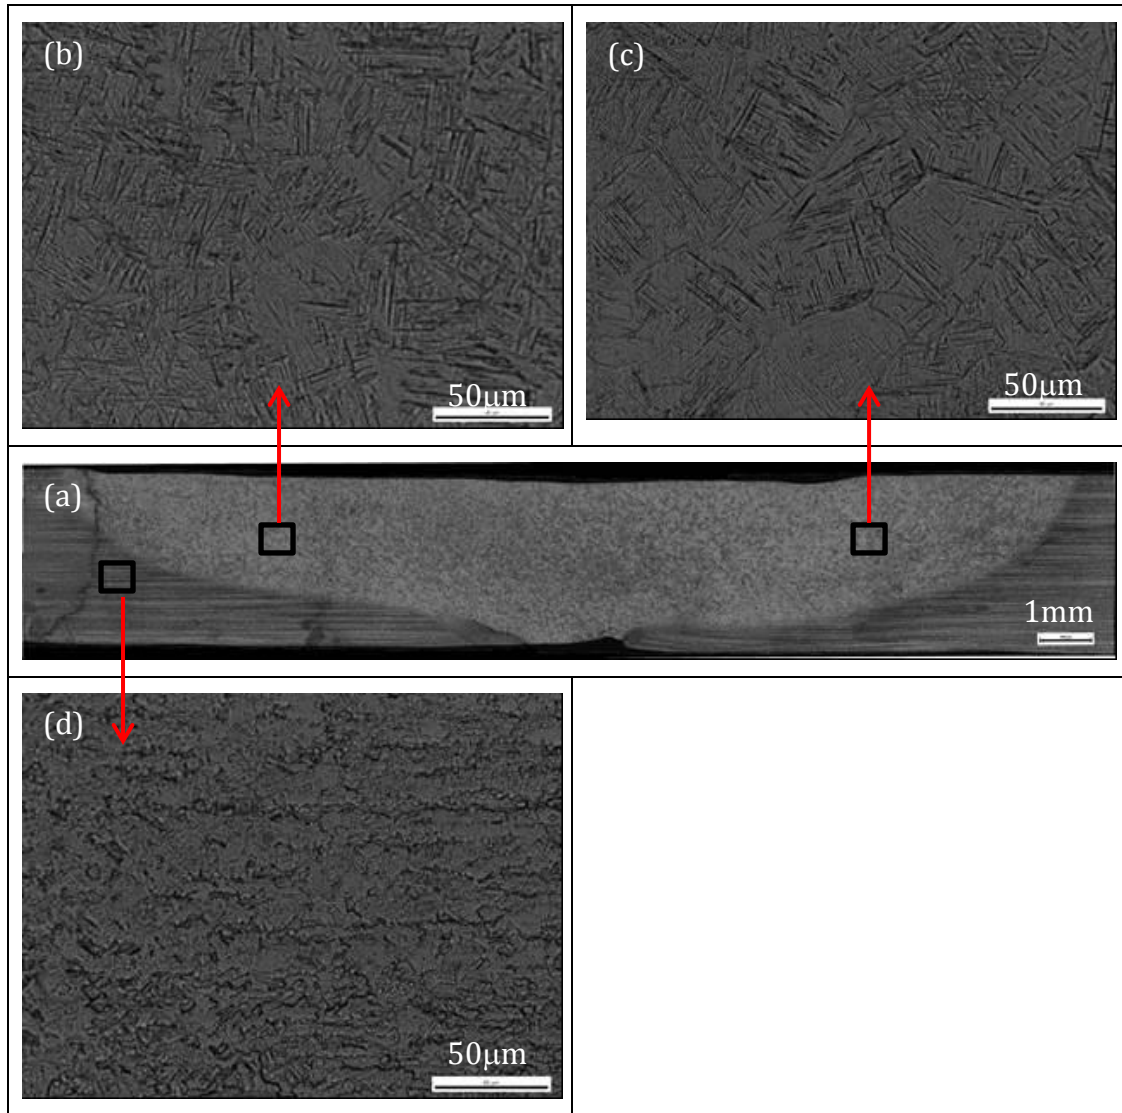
Different zones in W1 weld (a) Macroscopic transverse section (b) Nugget zone (AS) (c) Nugget zone (RS) (d) TMAZ
